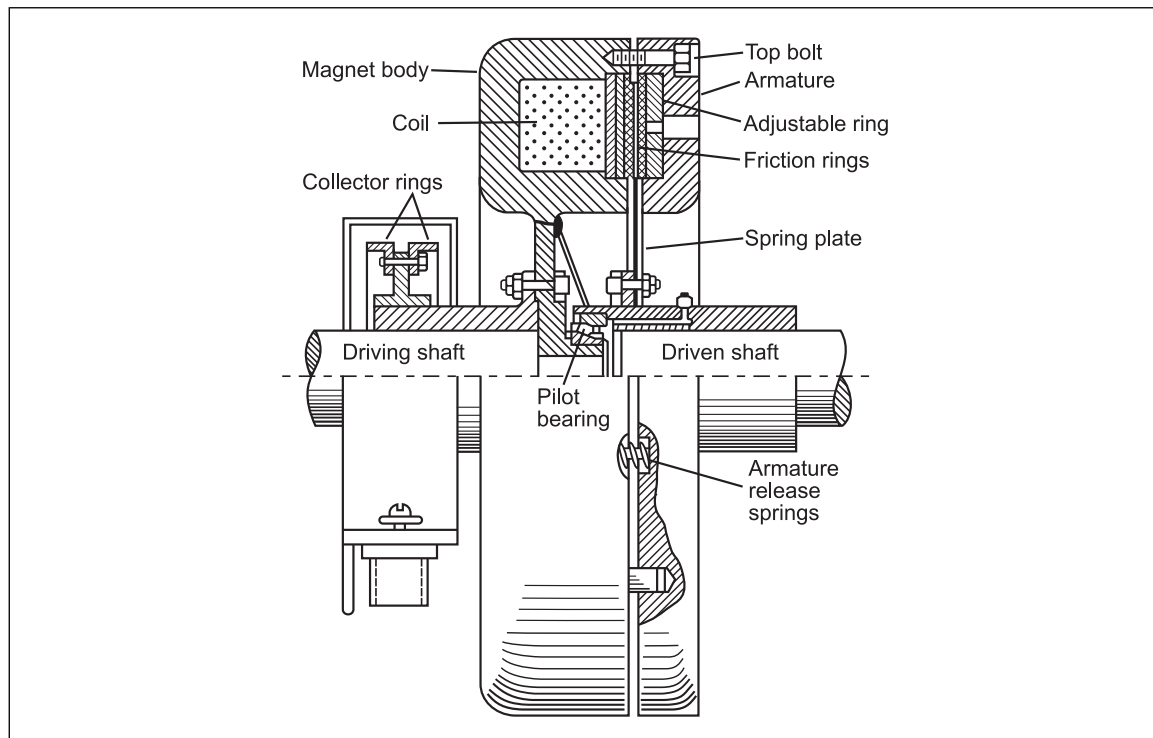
Single-disk magnetic clutch with double-friction surface.
